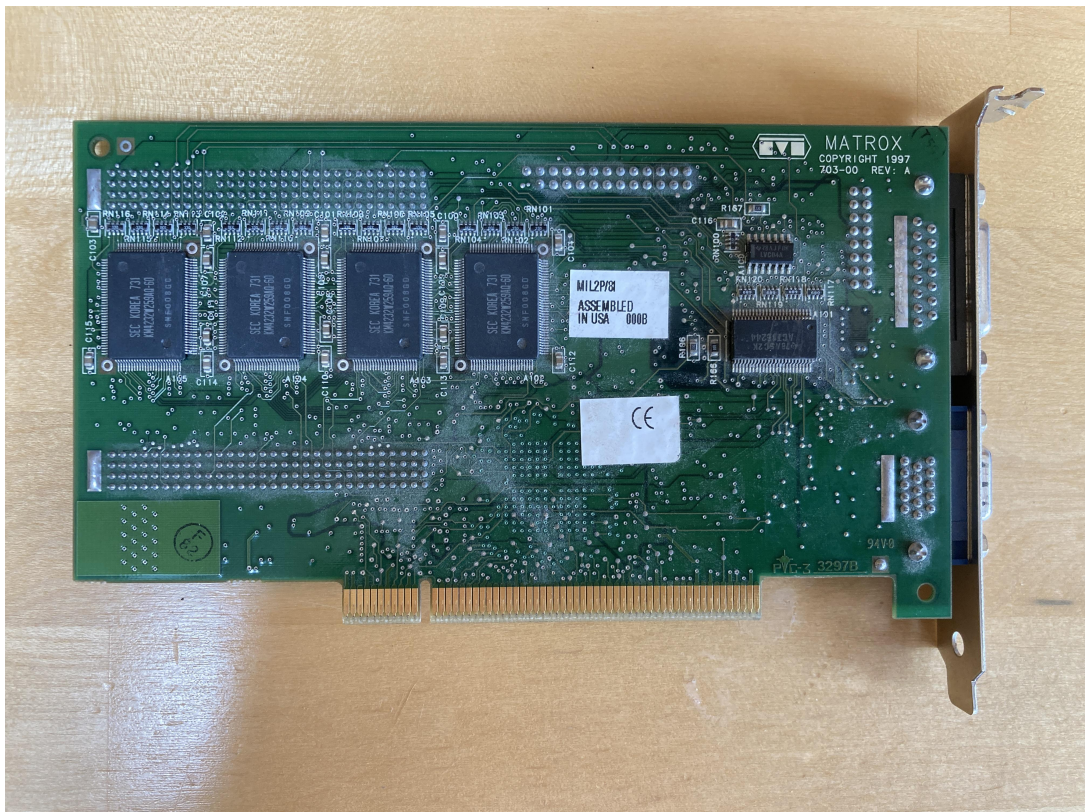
Matrox 703-00 Mil2p/8bn/20 Millennium 2 Graphics Card, bottom view
